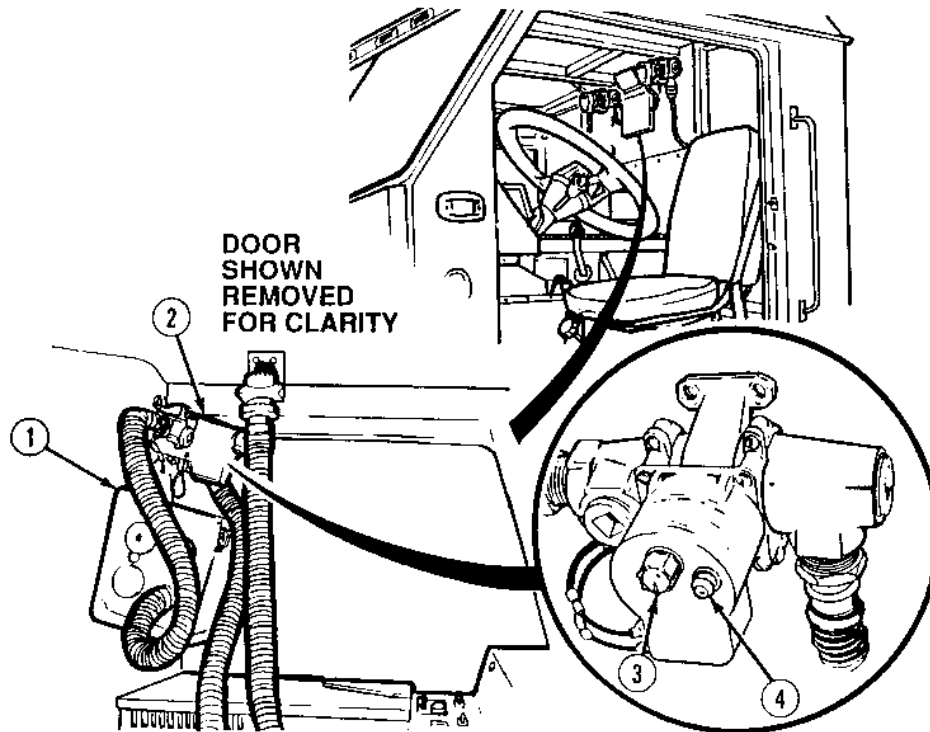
Gas Particulate Filter Unit (GPFU) Kit
